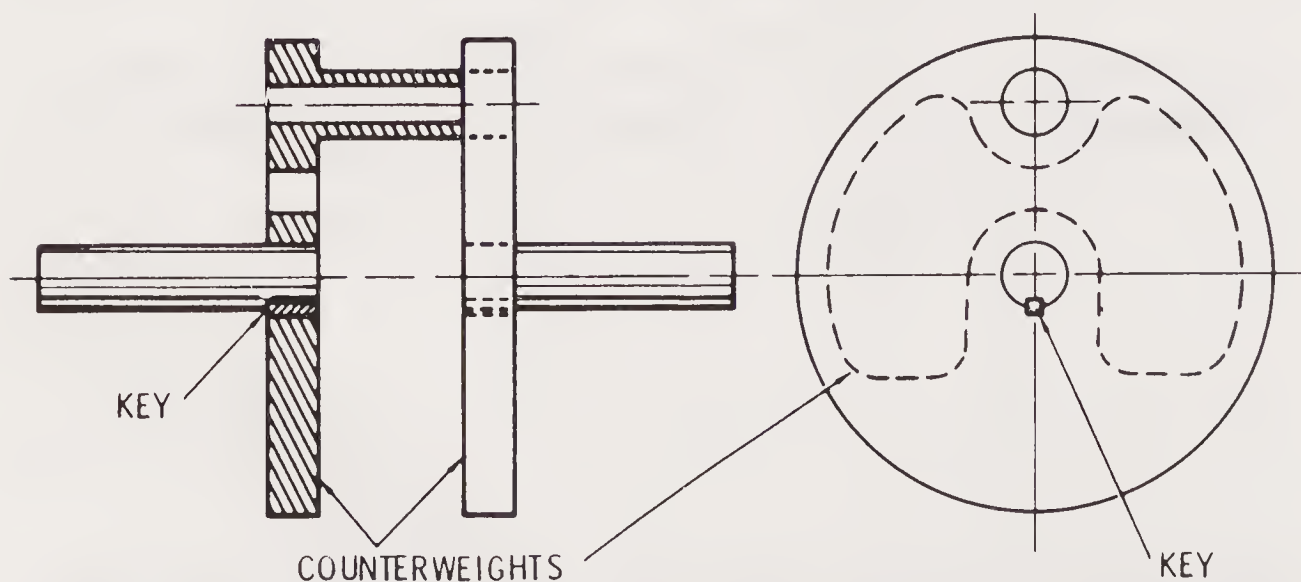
General construction of a disc, built-up, counterweighted shaft.
